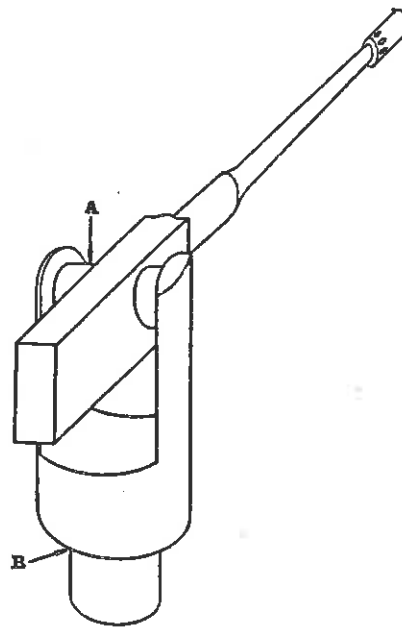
An example where gearless servo motors can be inserted into machined housings at A and B.
